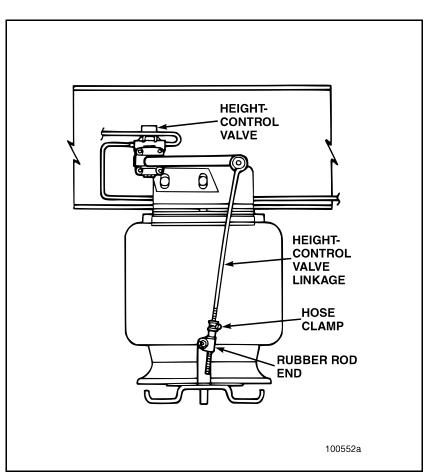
Height-Control Valve Linkage with Rubber Rod Ends (Except AL-405)
